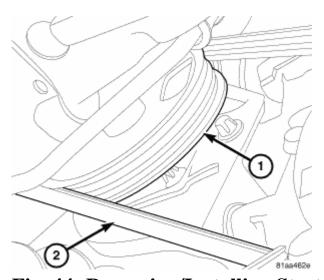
Removing/Installing Stretch To Fit Power Steering Belt Courtesy of CHRYSLER LLC
